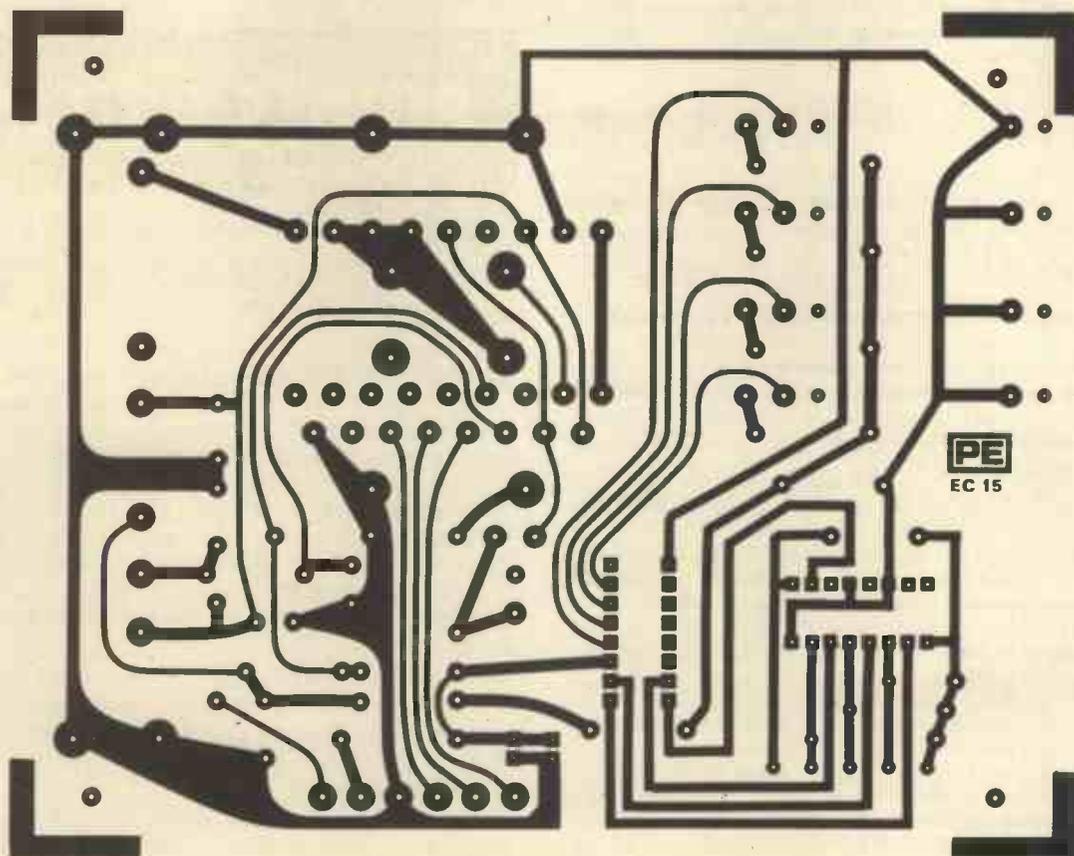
Corrected p.c.b. design for the Tuner board
